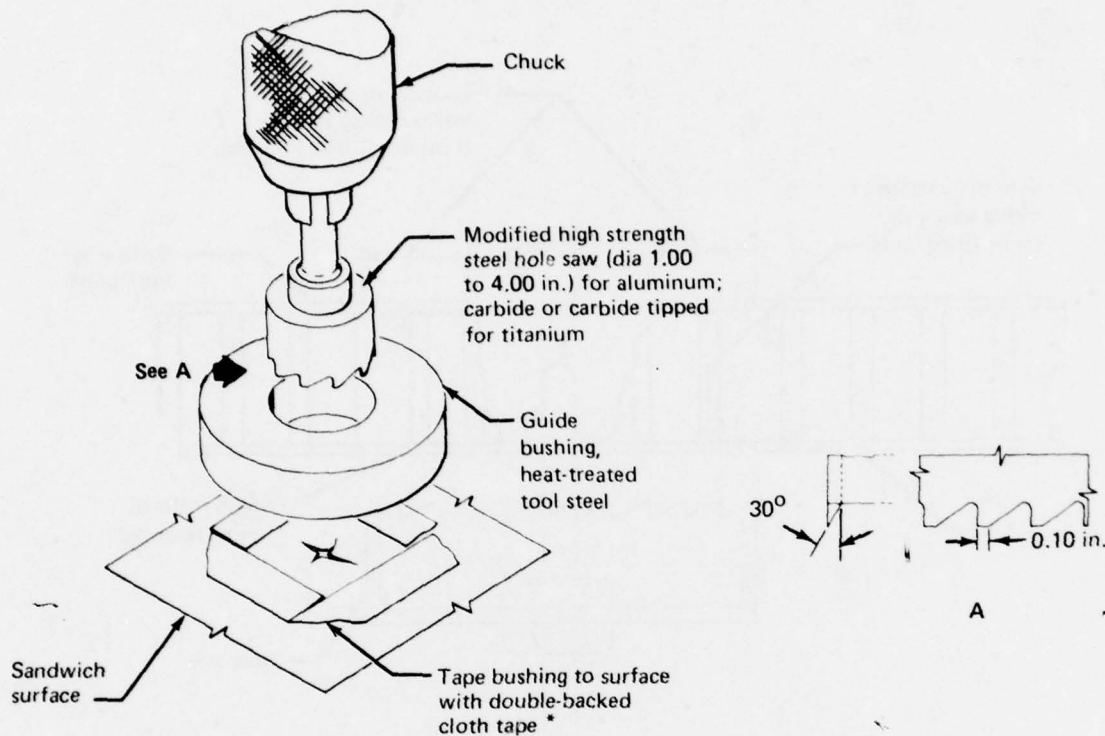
Hole Saw and Guide Bushing for Removing Sandwich Skin Material
